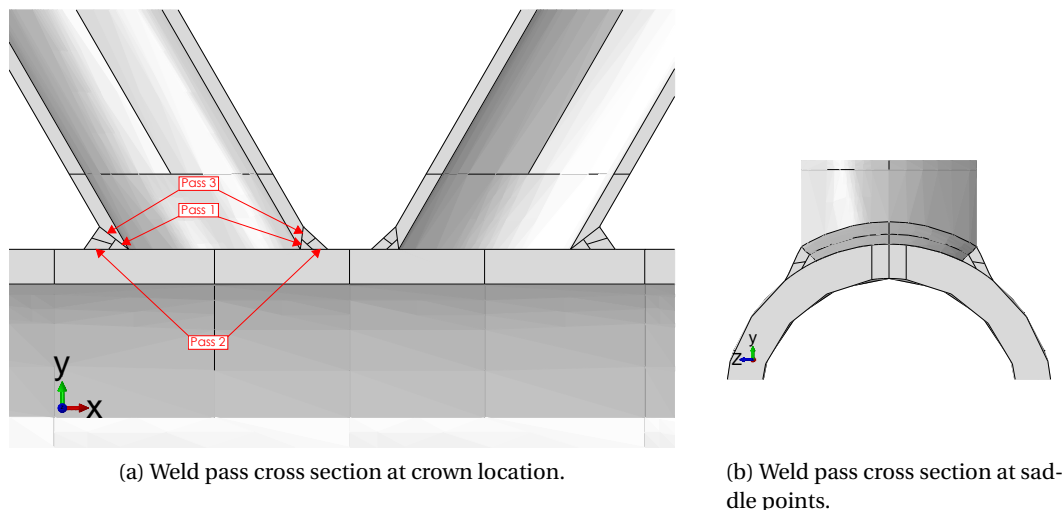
Weld section partitioning at various locations along the weld line.
